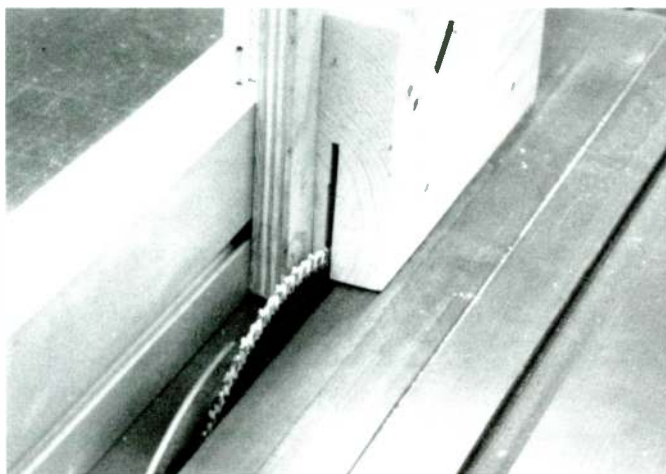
Cutting a slot in the holding fixture of the jig.
